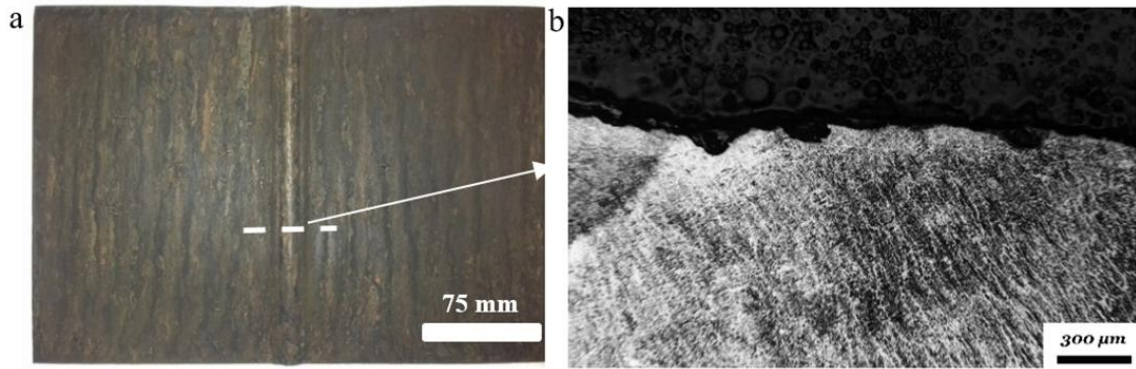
HY 100: (a) Specimen surface after salt spray test. Dash line indicates the area of the metallographic examination on transverse cross section; (b) Morphology of pitting corrosion at the weld metal
